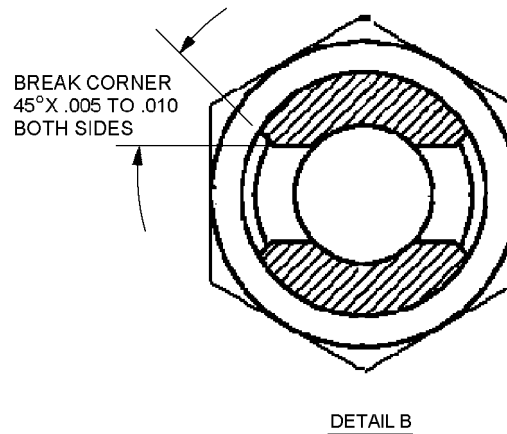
Bolt - fluid passage dimensions and configurations.
